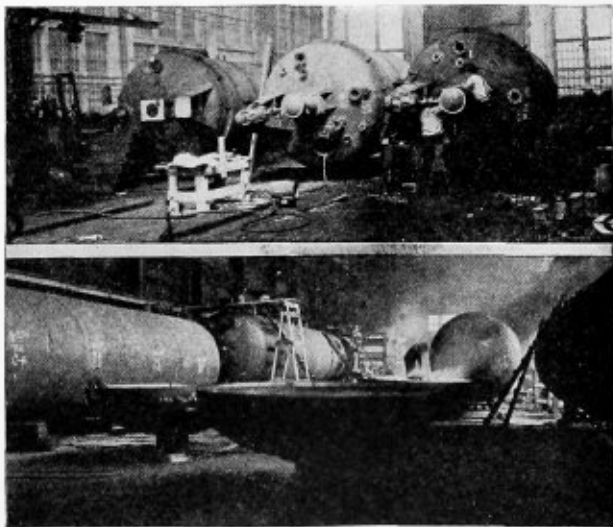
(Above) Welding department. Fig. 7.—(Below) Three vessels of complex design
